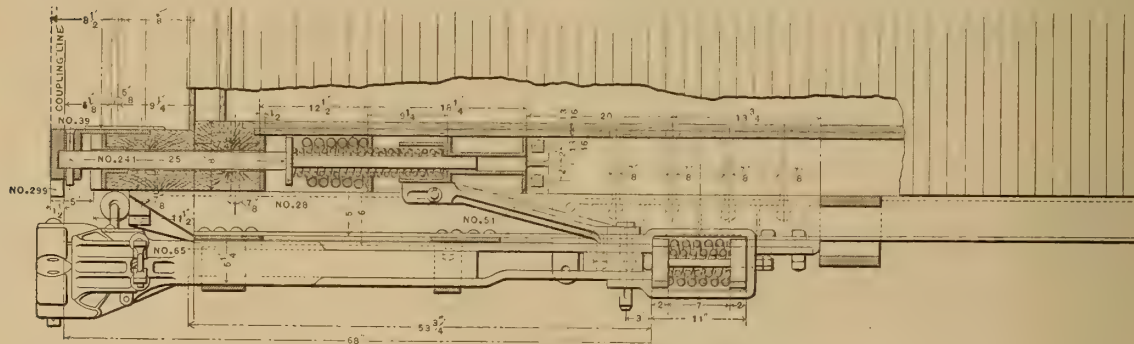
SECTION OF GOULD DUMMY VESTIBULE AND DRAFT GEAR FOR BAGGAGE AND EXPRESS CARS.
